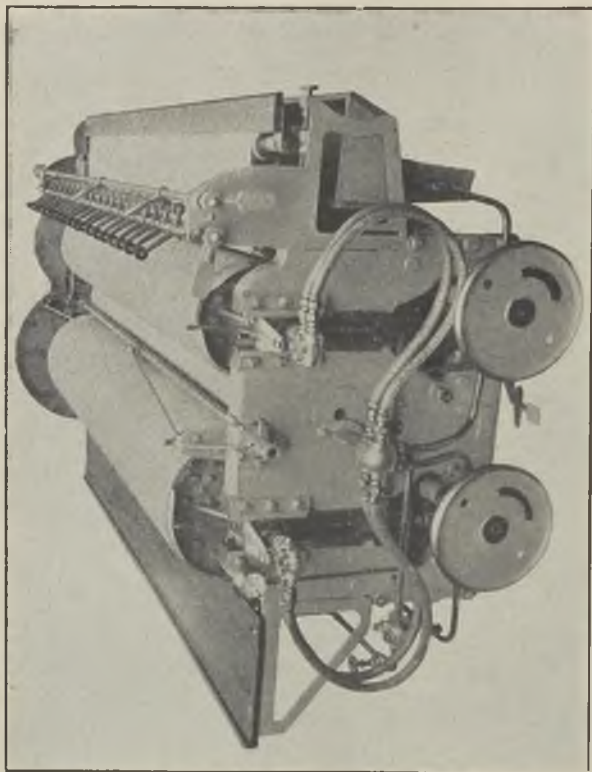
TULLIS STARCHWORK IRONING MACHINE.
